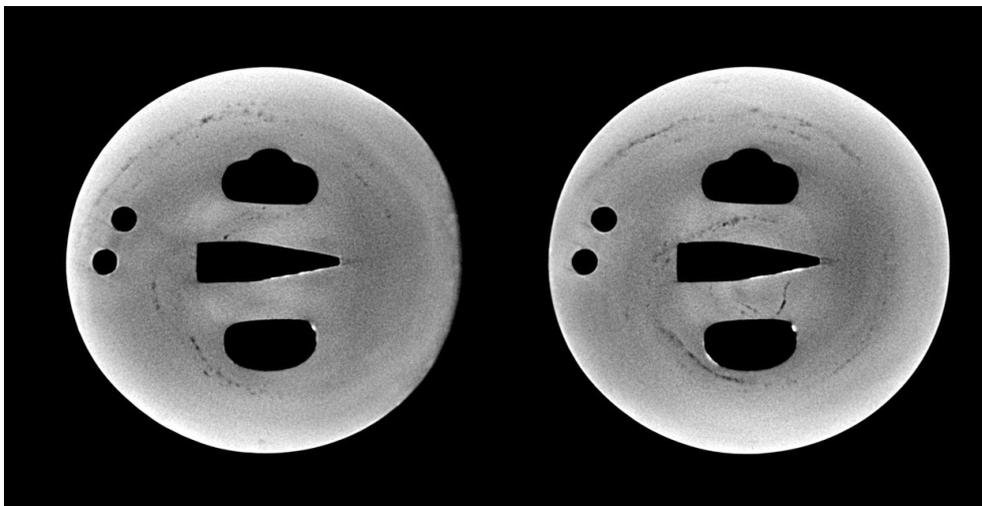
Laminography slices inside the tsuba, spaced 1mm each other. It is evident the presence of welding lines (strong and weak) having spiral shape.
